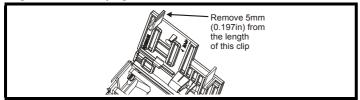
Fitting the heatsink mounted braking resistor on a size 2
